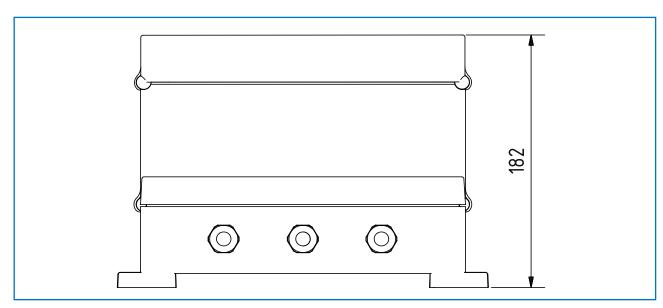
Dimensions of the MSE 300 in the field housing (side view)
